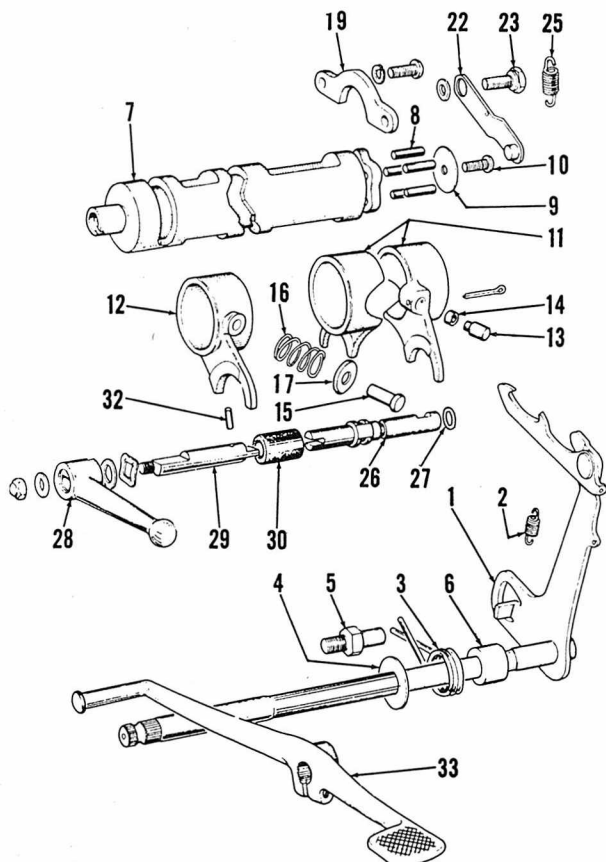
Exploded view of gear selector mechanism. Shift forks (11) for the first four speeds are interchangeable.
